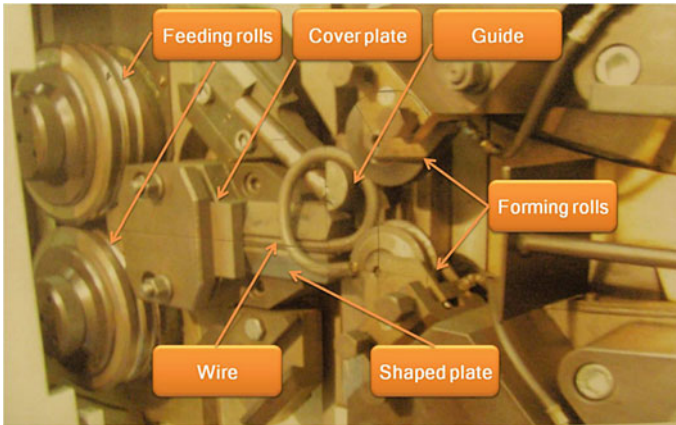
Coil forming machine. *Source* FEM analysis of the forming process of automotive suspension springs, *Semantic Scholar
